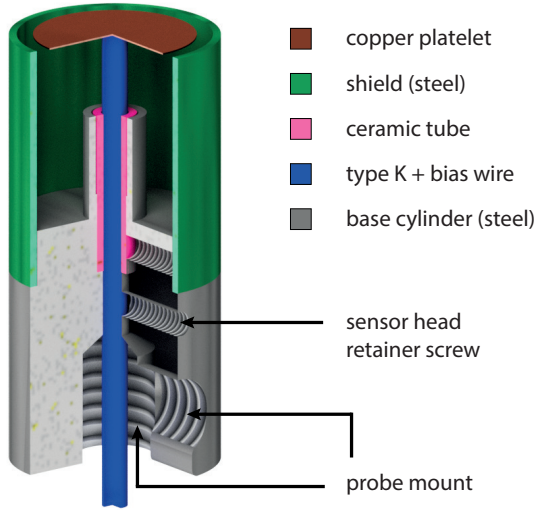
Schematic drawing of the PTP sensor head. The Type K thermocouple and the wire for biasing are spot-welded to the back of the copper platelet that represents the substrate. The whole sensor is housed in a stainless steel cylinder to shield it from any surrounding influences other than the ones coming from the upper half-space.
